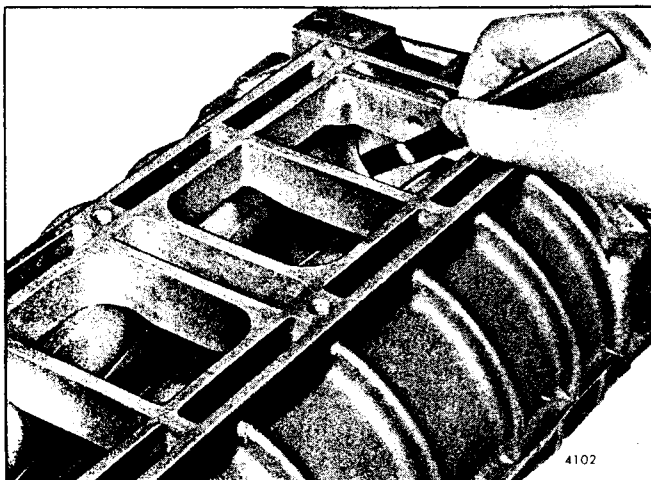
Measuring End Clearance Between Blower Rotors and End Plate
